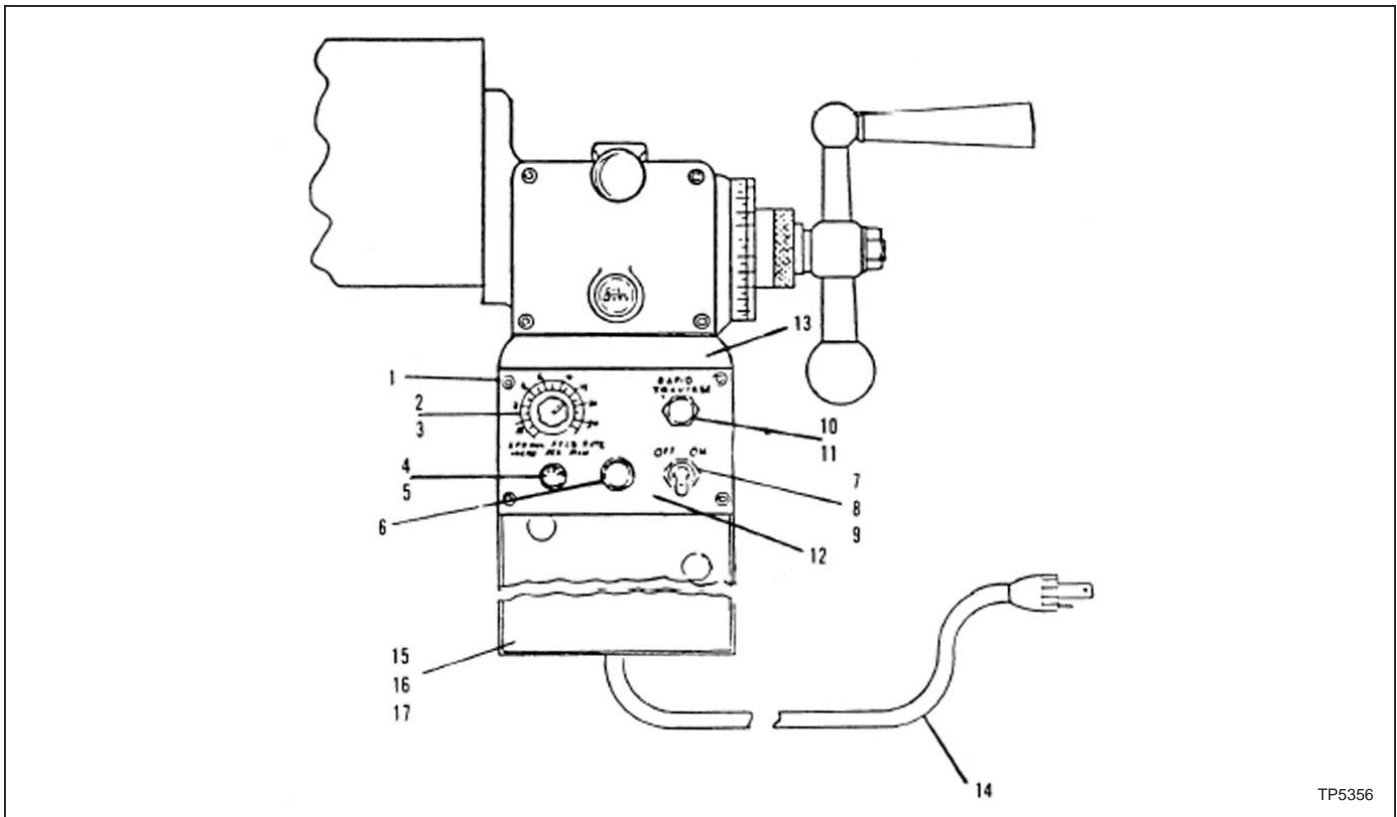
Power Feed X-Axis Control Assembly, Front View
